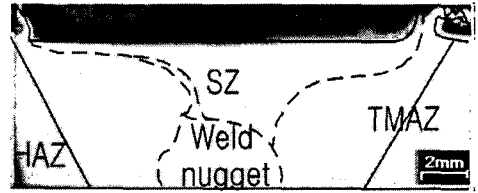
Transverse cross-section macrostructure of FSW Butt-jointed specimen
